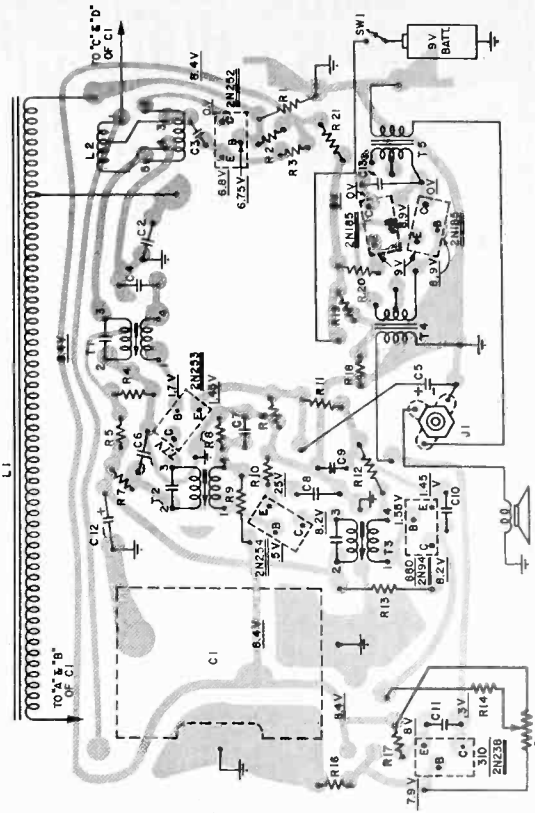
Bottom View of Printed Board Showing Top Components Symbolically
